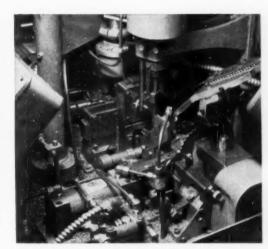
Close-up of terminal block maker showing broaches, screw inserter and final cutoff saw.
